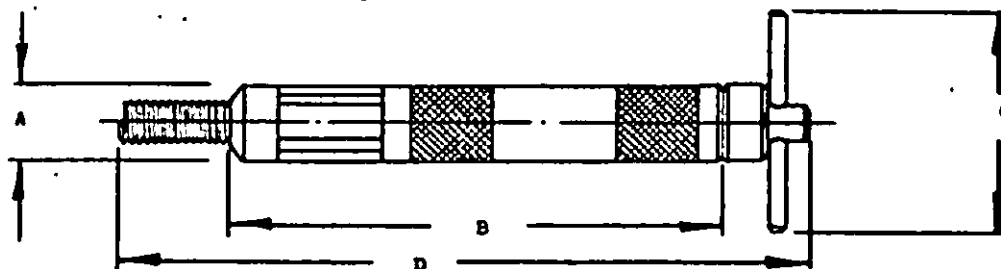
Style A, class 1, prewinder inserting tools, with threaded mandrel for spark plug threads.
